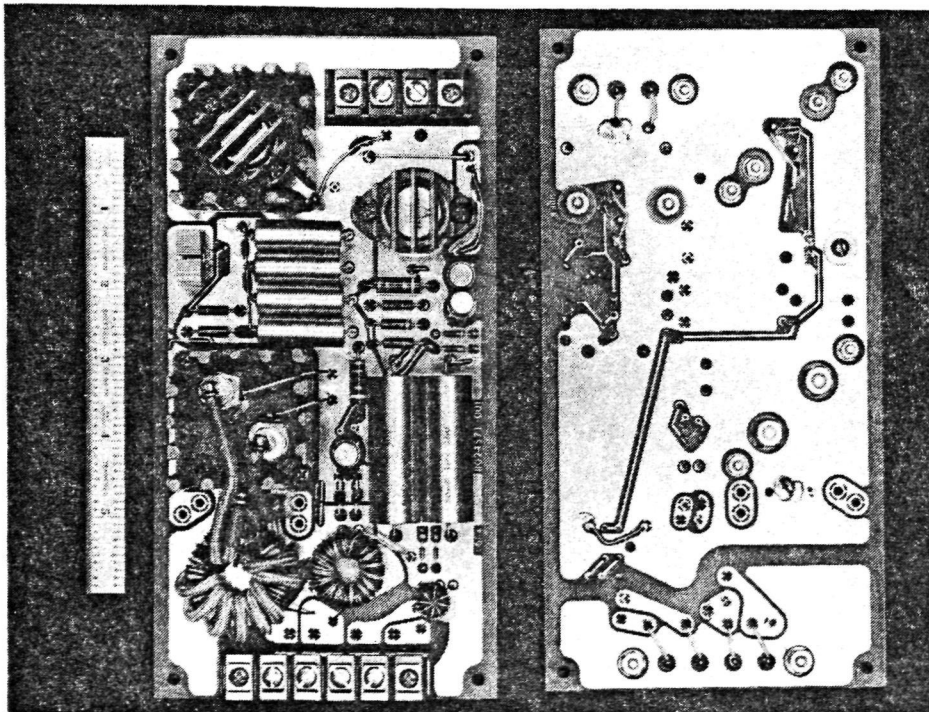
Transistor Base Drive Power Output Circuit Card Assembly
